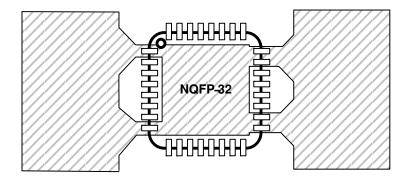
Example of NQFP-32 PCB Ground Plane Layout in Top View (Preferred Layout at Top and Bottom)
